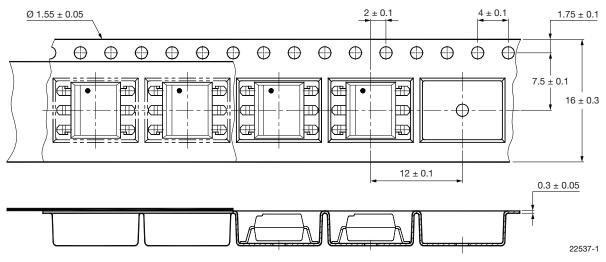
Tape and Reel Drawing, 1000 Units per Reel
